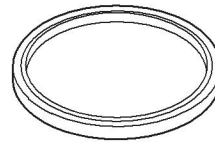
892/01259 Crankshaft Rear Oil Seal Spacer Ring
